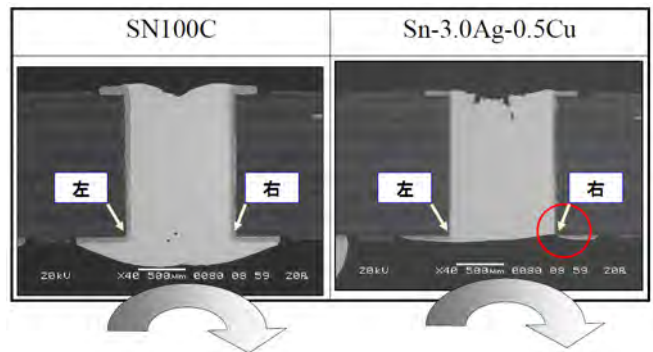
Erosion of the shoulder of a plated through hole on double sided board
